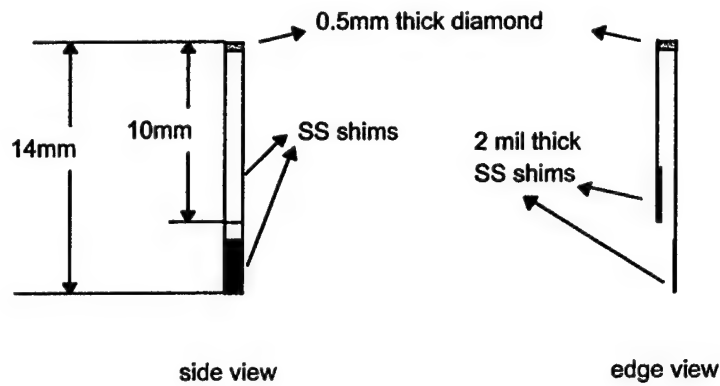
Schematic drawing of a diamond-shim assembly: it is essentially a pair of stainless steel shims soldered to a diamond pixel.
